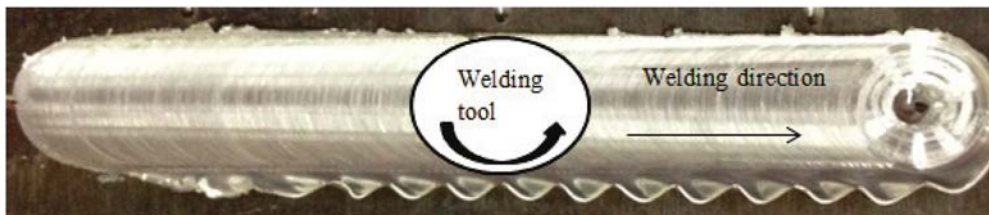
FSP sample showing excess material on the advancing side and rotational and welding direction of the tool.
